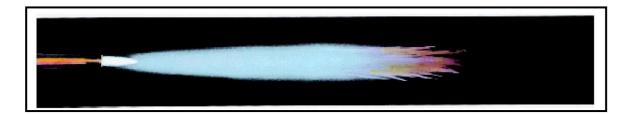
Oxyfuel gas welding flame used for gas welding as well as for Brazing.
